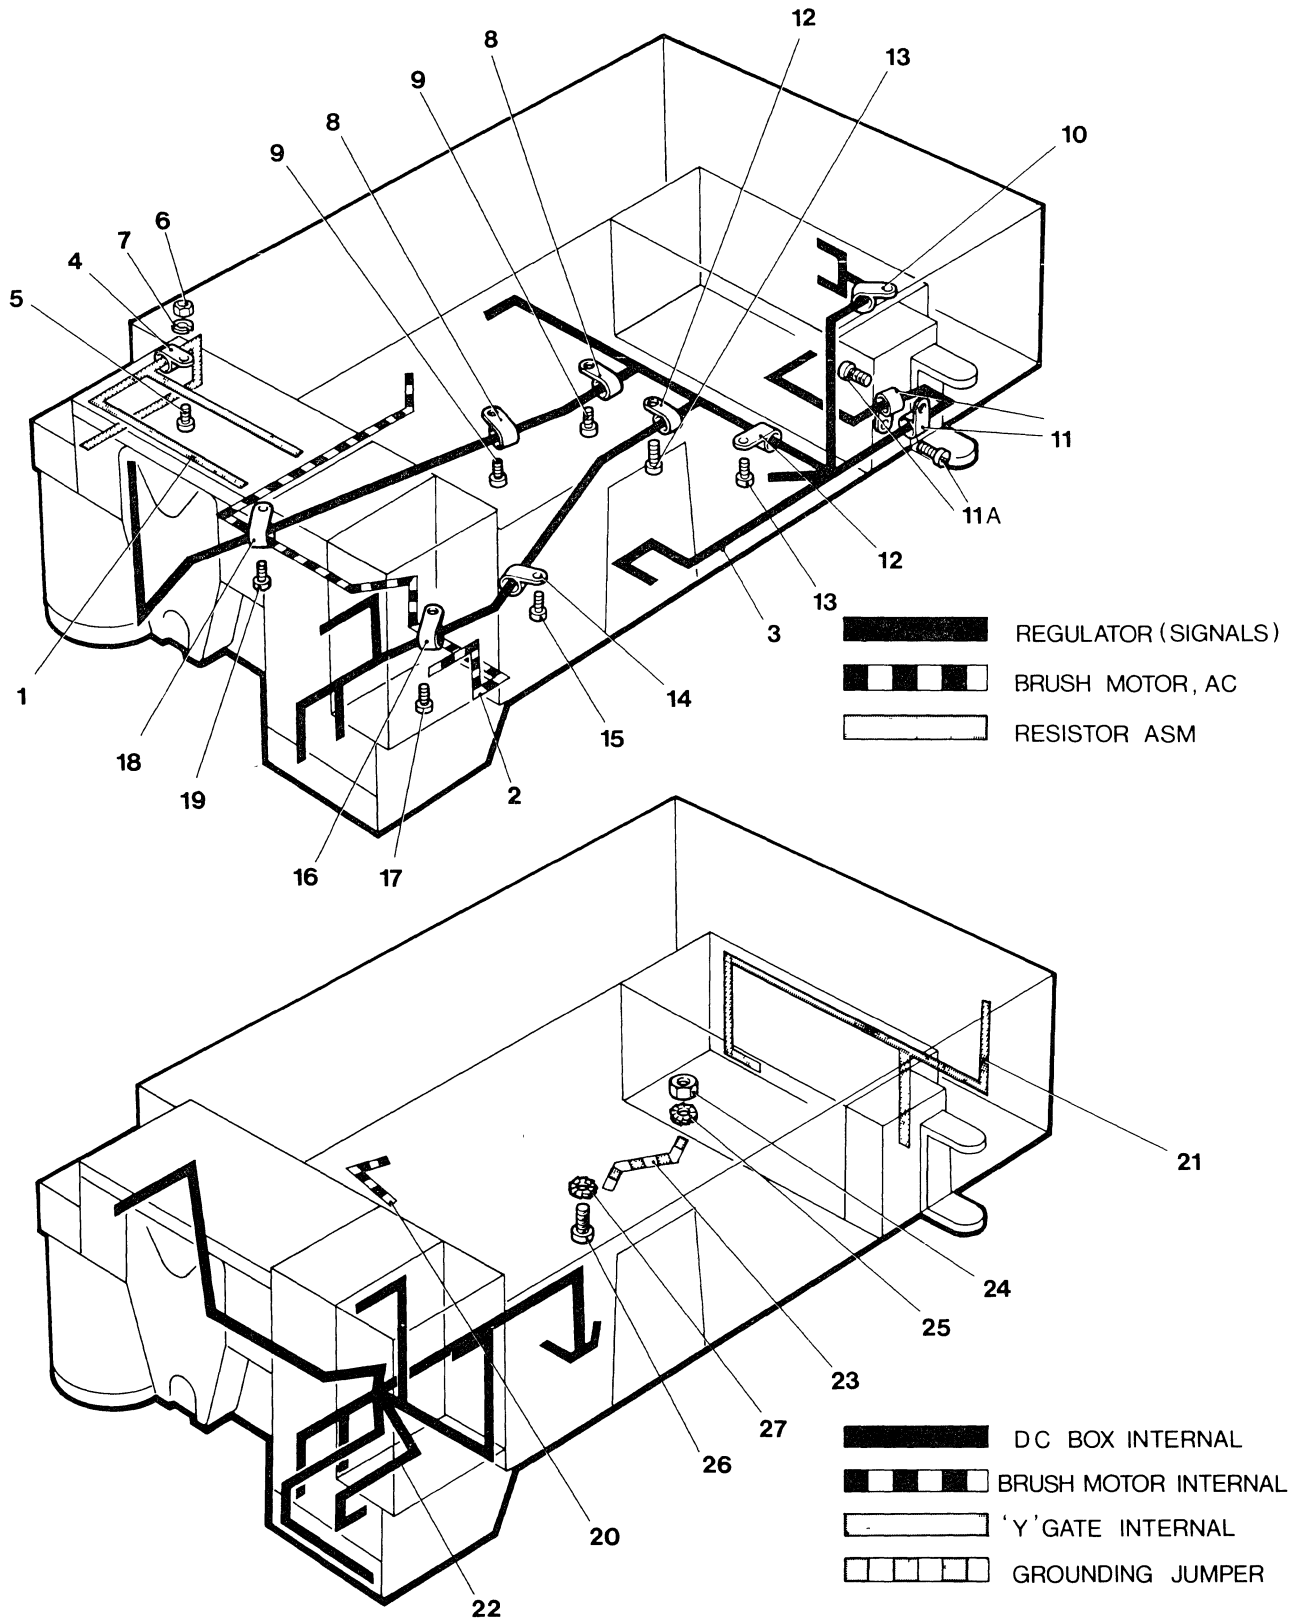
CABLE ASSEMBLIES (PART 1 OF 2)
